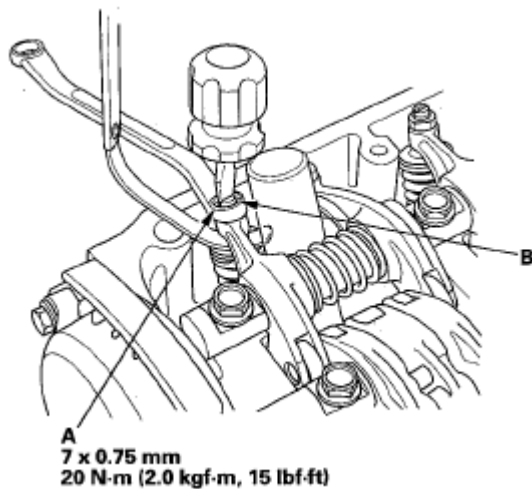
Identifying Locknut And Adjusting Screw With torque Specifications
